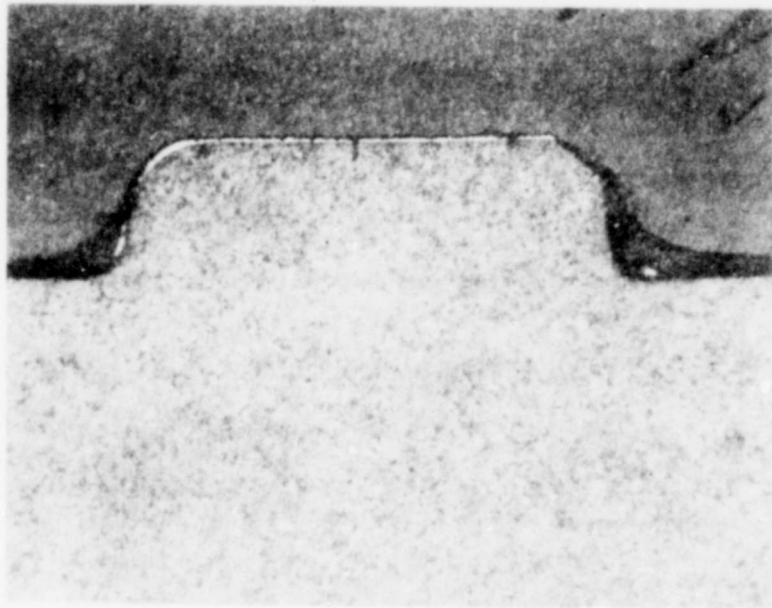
Bore sample showing cross sectional geometry of a worn land.
